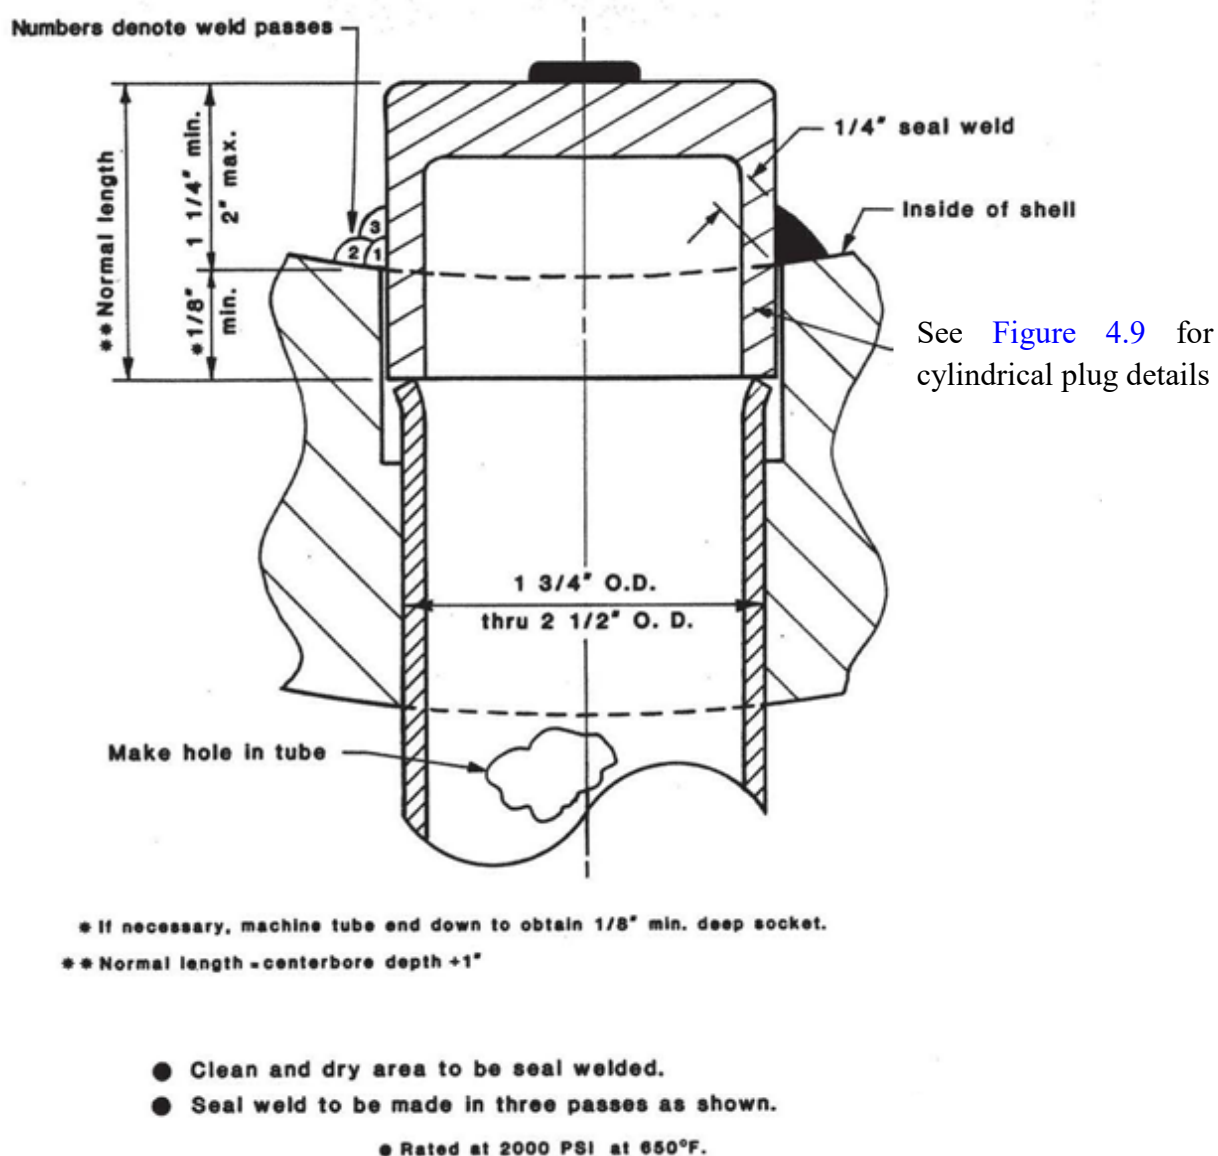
Cylindrical Plug for Internally Counterbored Drum Shells for Tubes 1 3/4" through 2 1/2" O.D.
